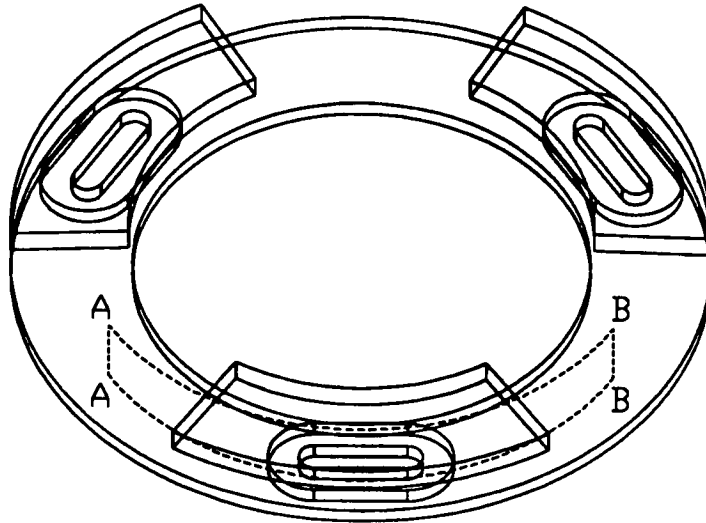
3D view of the magnets, coils and lower fluxplate.
